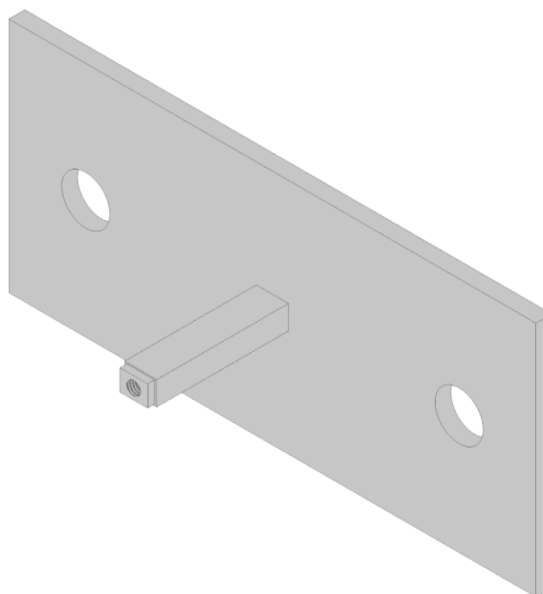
Optimized fixture for the apparatuses. The angular position is fixed by tongue and groove joint fitting using the parallel surfaces of the hole depicted in Fig. 2 of the HeliDist units.
